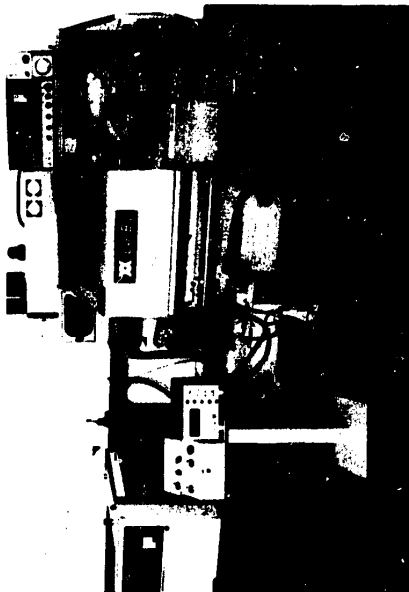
Automatic, flexible model LG-81 lathe with attached Fanuc industrial robot and external gauging system and sorting unit.
